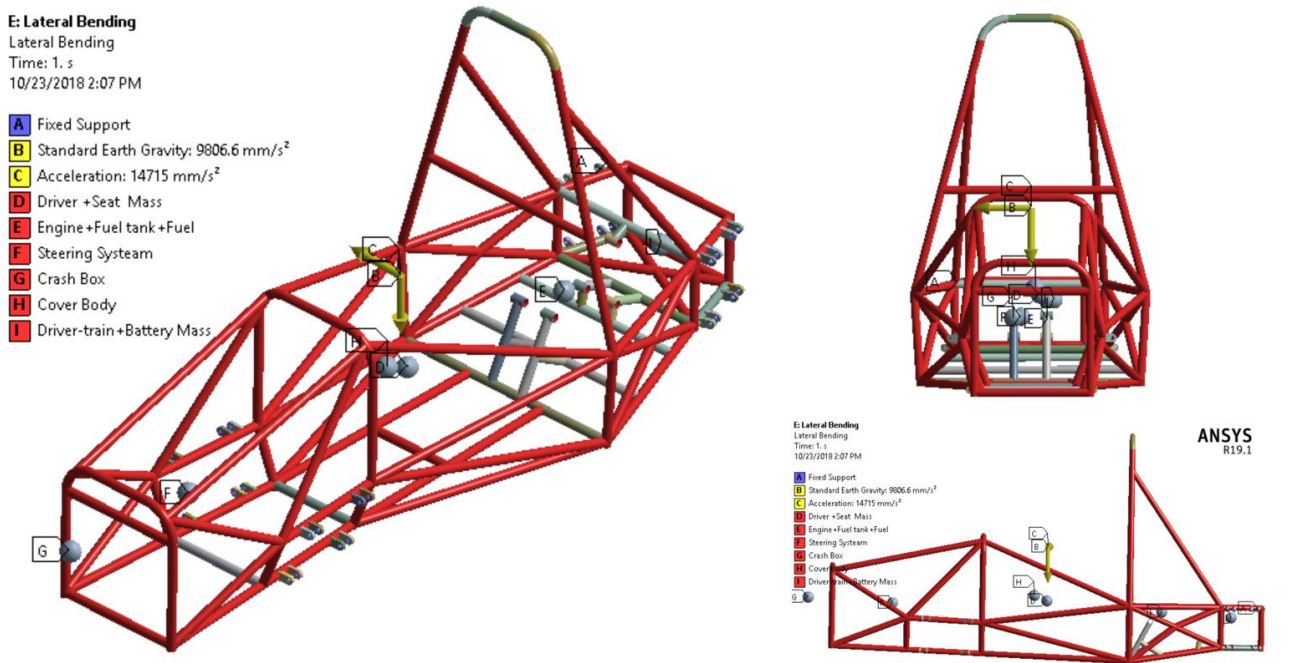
Lateral bending (cornering) load applied on the Formula SAE M2 Chassis (front, side, and isometric view)
